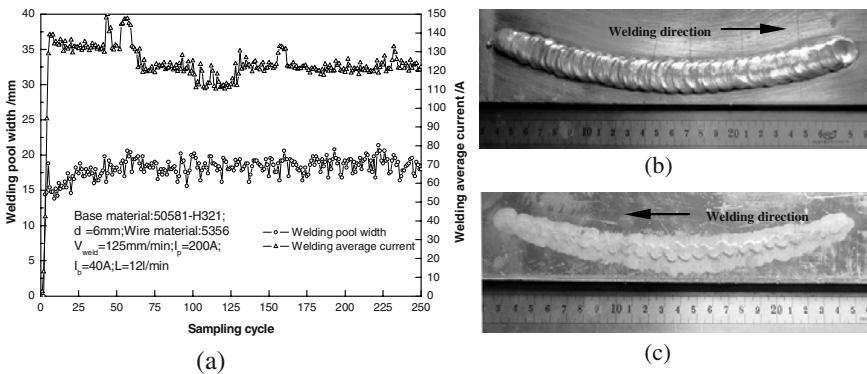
Curves of weld pool width in Fuzzy-ES control (a) and photograph of workpiece with Fuzzy-ES control: (b) Topside; (c) Backside
